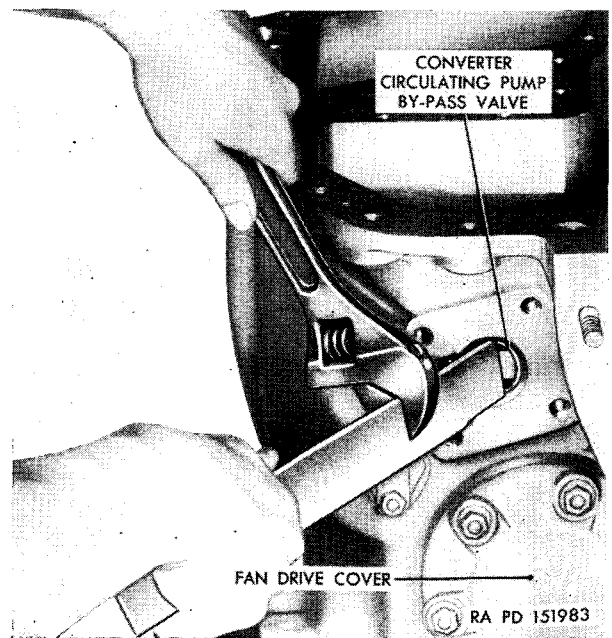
Removing or installing circulating pump-by-pass valve assembly.
